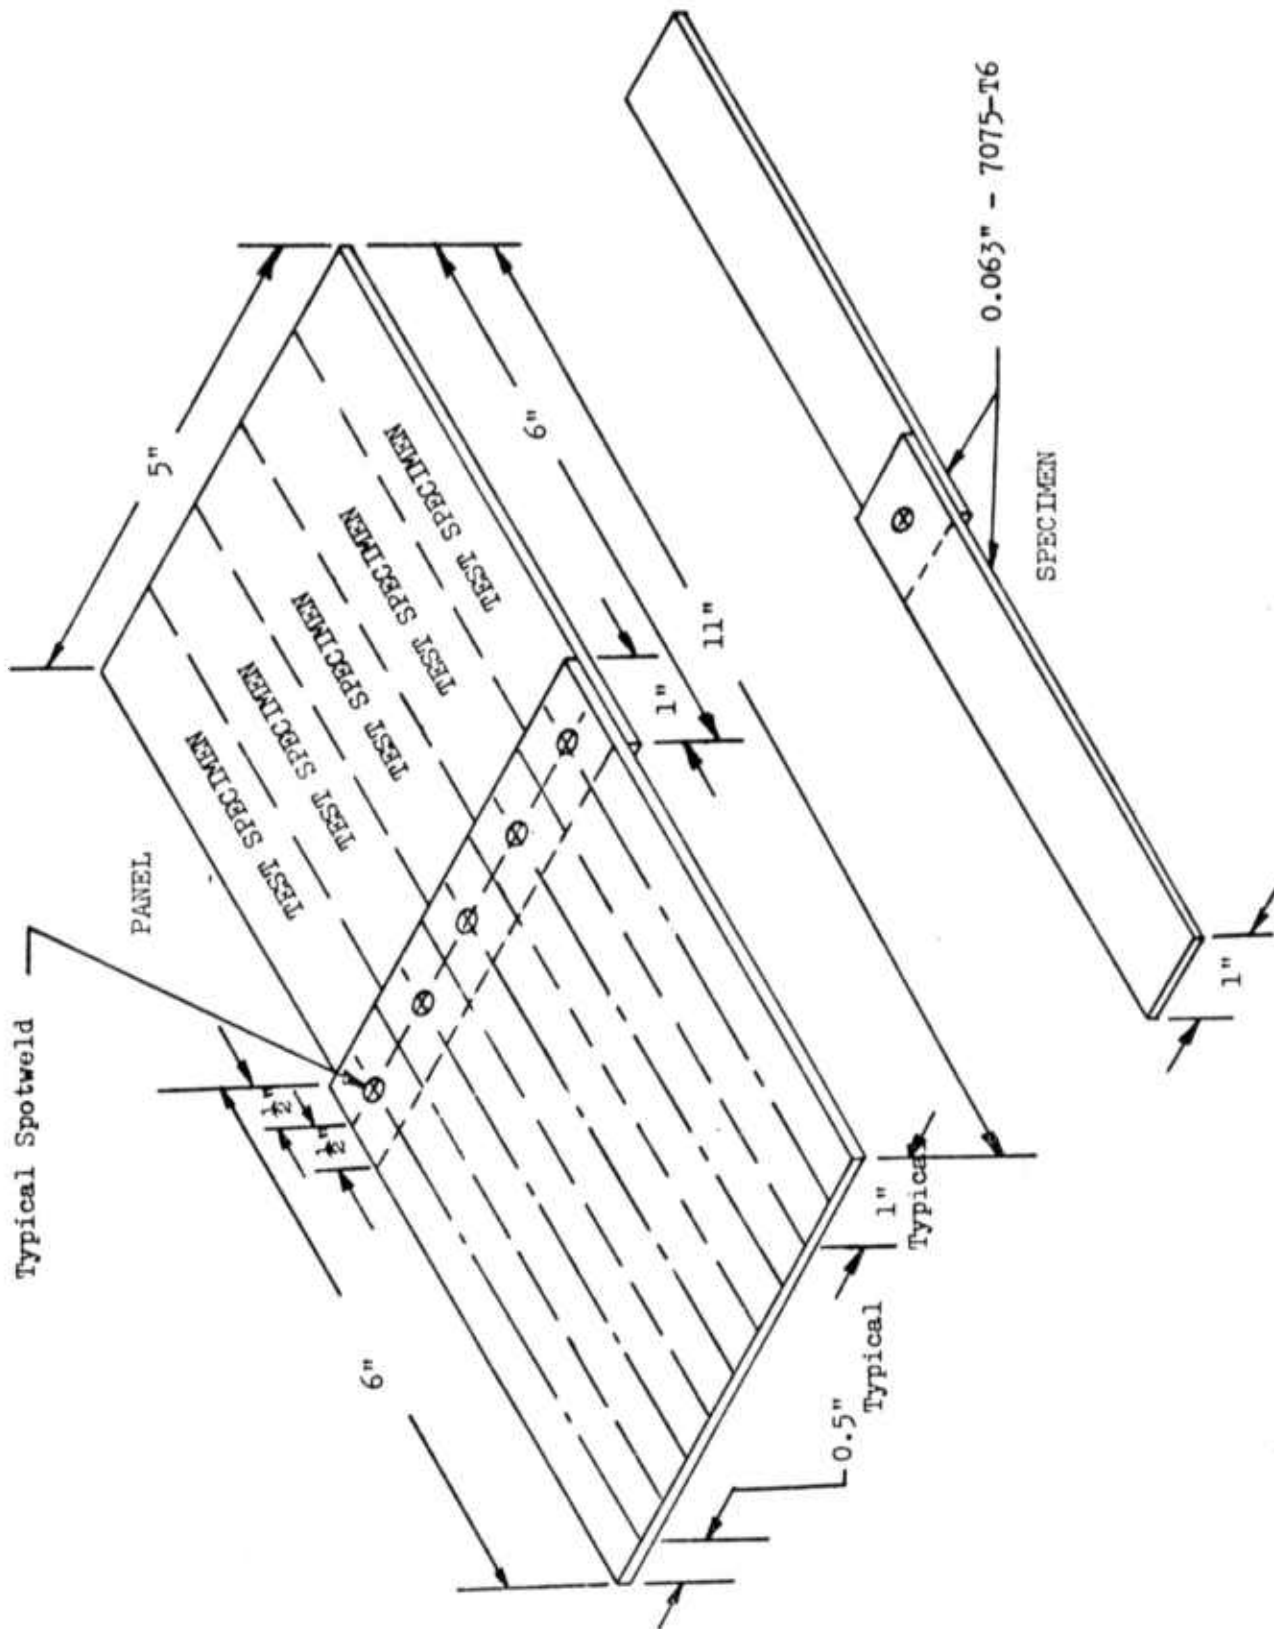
LAP SHEAR, WELDABILITY AND WELDBOND TEST PANEL AND SPECIMEN (L/t = 16)
